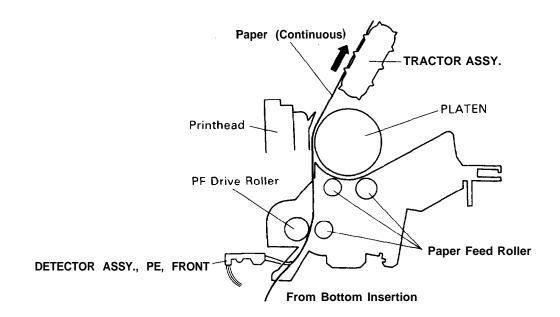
Paper Path for Bottom Entrance Pull Tractor Feed
